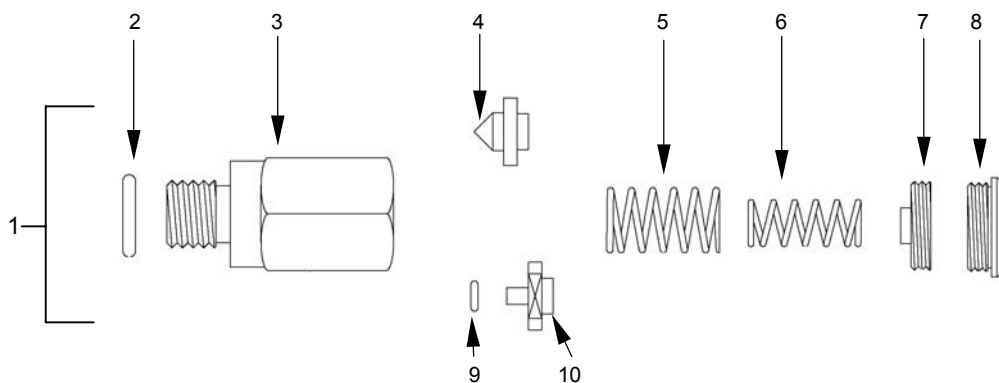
Exploded View of Oxygen Regulator Relief Valve
